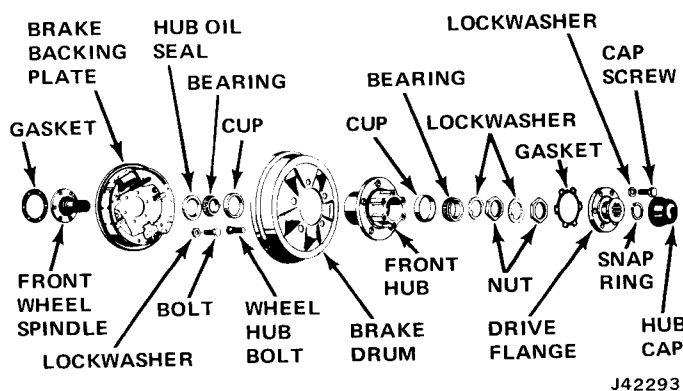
Front Wheel and Hub Assembly—CJ Models
